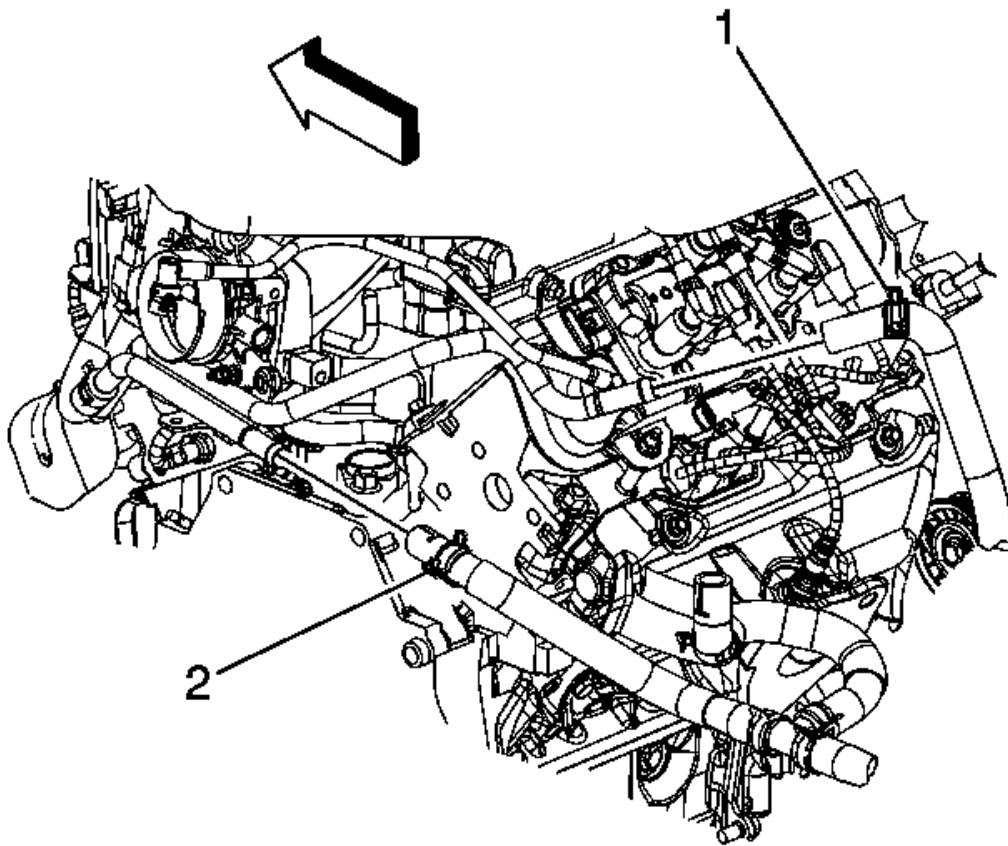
View Of Heater Inlet (1) And Outlet (2) Hose Clamps
